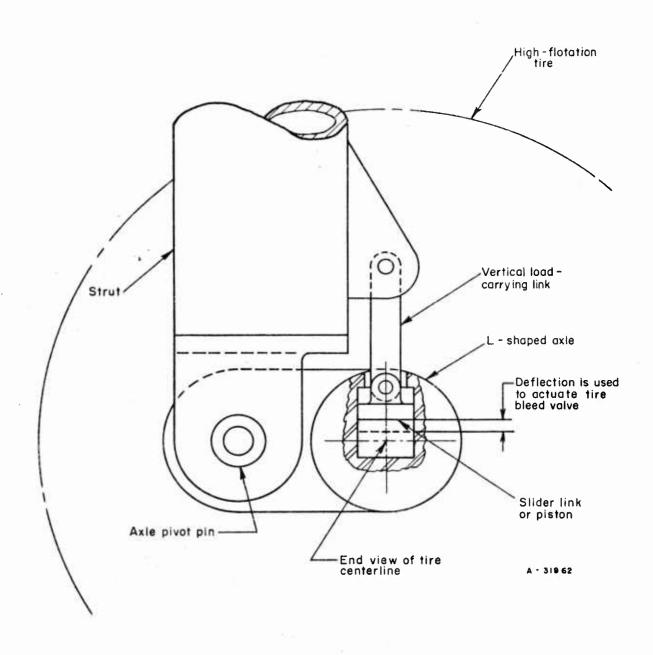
SCHEMATIC DRAWING OF THE MOUNTING LINKAGE OF THE 1500-POUND LANDING-GEAR UNIT
